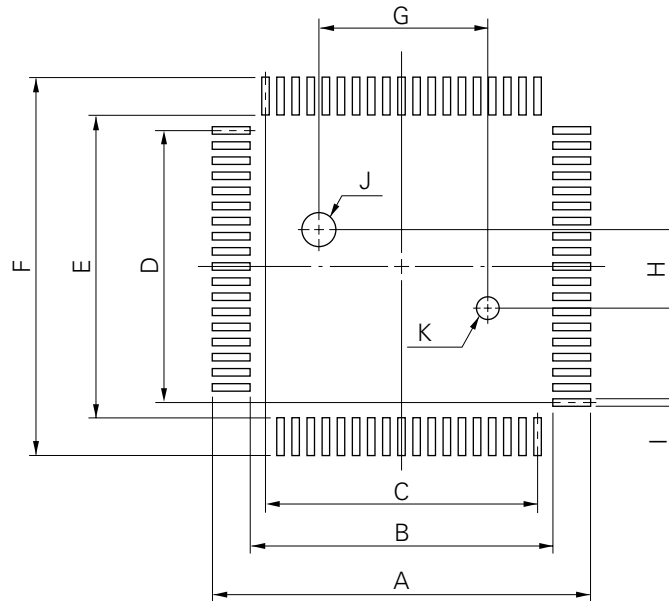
Drawing of Conversion Socket (EV-9200G-74)
